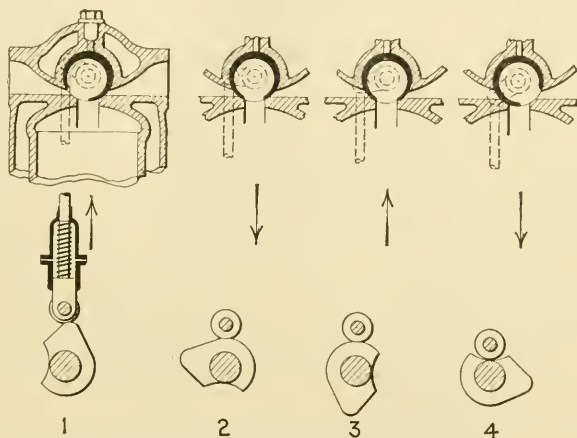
DUBOIS-ROUSSEAU SLIDE VALVE GEAR
